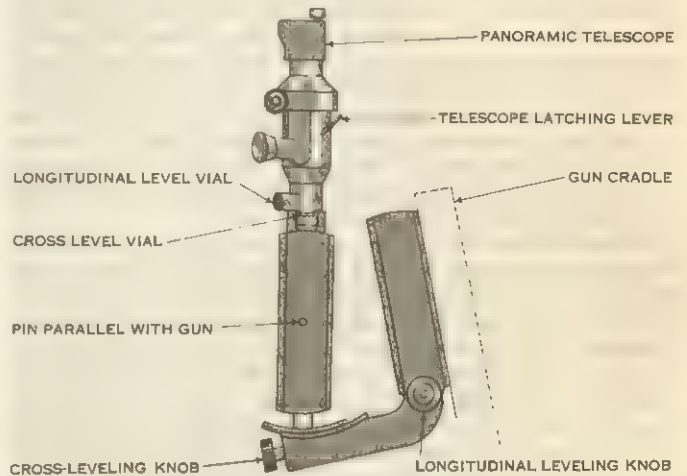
CANT COMPENSATING TELESCOPE MOUNT
